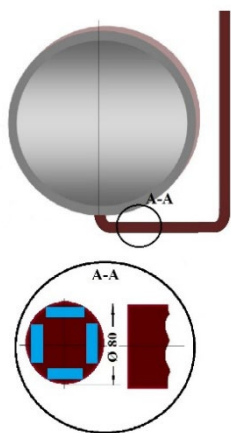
Diagram of the system feeding metal to the casting of ball and places where the test samples were cut out marked in blue
